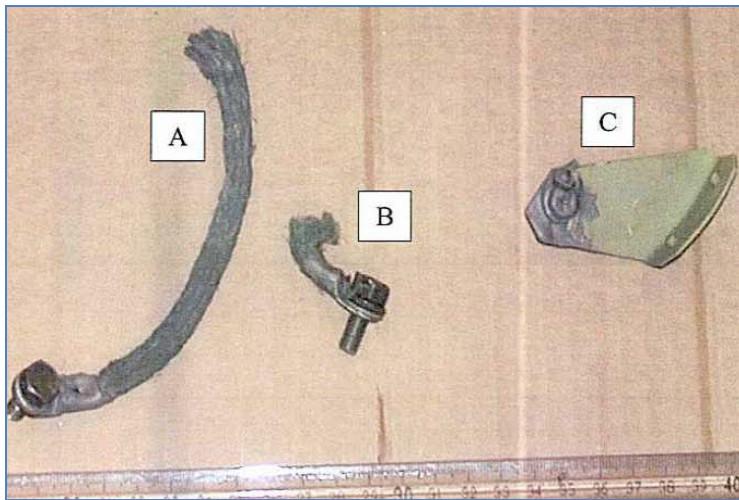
Damaged bond jumpers (earthing wires) loose and damaged bracket
